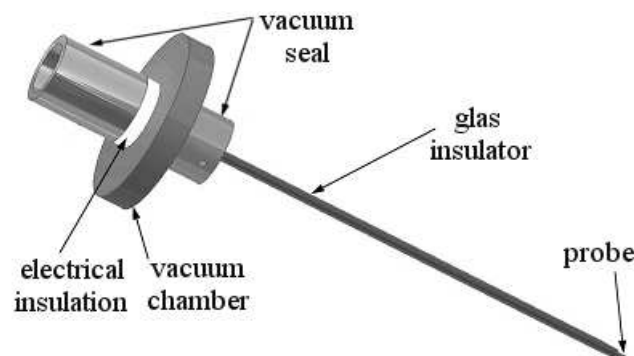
Probe assembly with electrical insulation and vacuum seal
